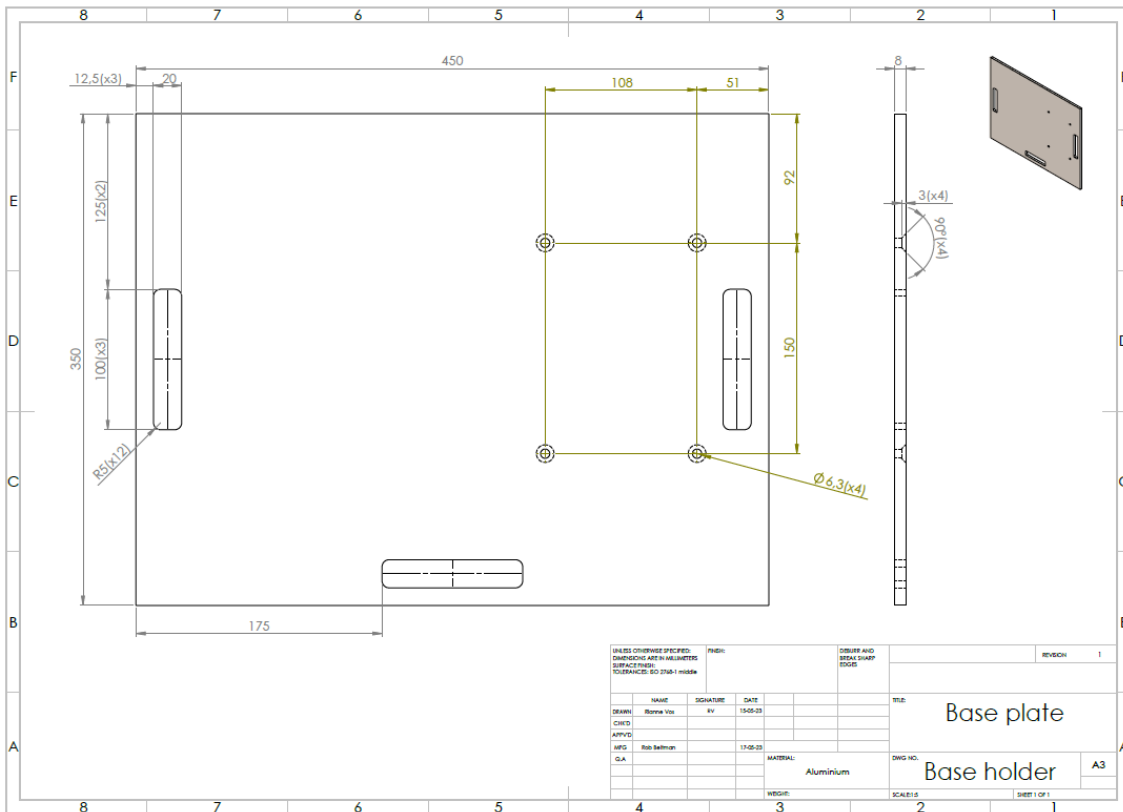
Drawing of baseplate created in SolidWorks with dimensions in millimeters (mm). The drawing serves as reference for the sawing and milling production process.
